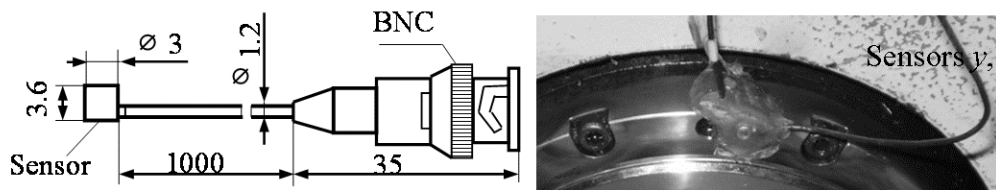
AP2019 type accelerometer (left) and its mounting on the machine 500/V5 spindle block (right) along the machine y and z axes (x axis is not shown).
